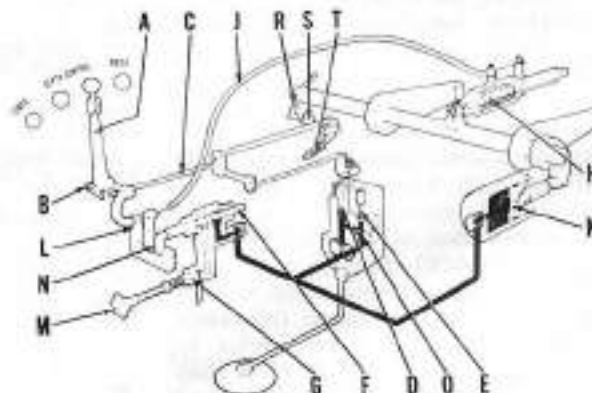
Drawing illustrating Implematic hydraulic system when operating in traction control. Refer to Fig. 139 for draft control operation, to Fig. 140 for height (position) control operation and to Fig. 141 for operation of remote external cylinder. Paragraph 197 explains traction control system operation.
